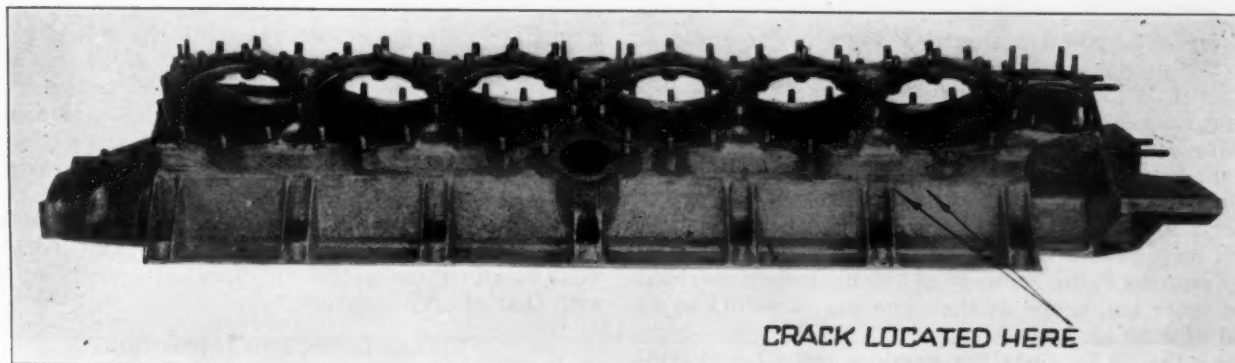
CRANKCASE THAT CRACKED IN SEVERAL PLACES WHILE UNDERGOING TESTS
